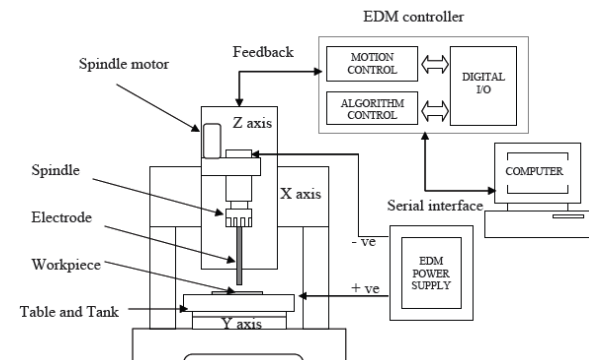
Schematic diagram of the setup with multi-purpose miniature machine tool.
